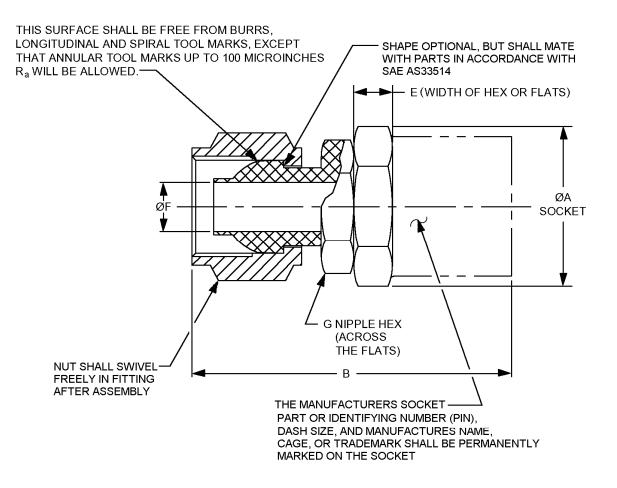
Fitting end, straight, flared tube dimensions and configuration.
